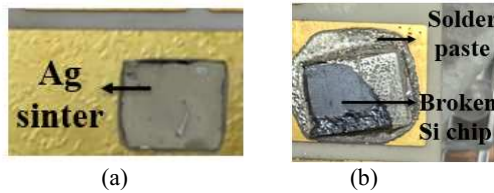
Shear test results for different die attachment material (a) Pressure-less silver paste, (b) Pressure-less solder paste
